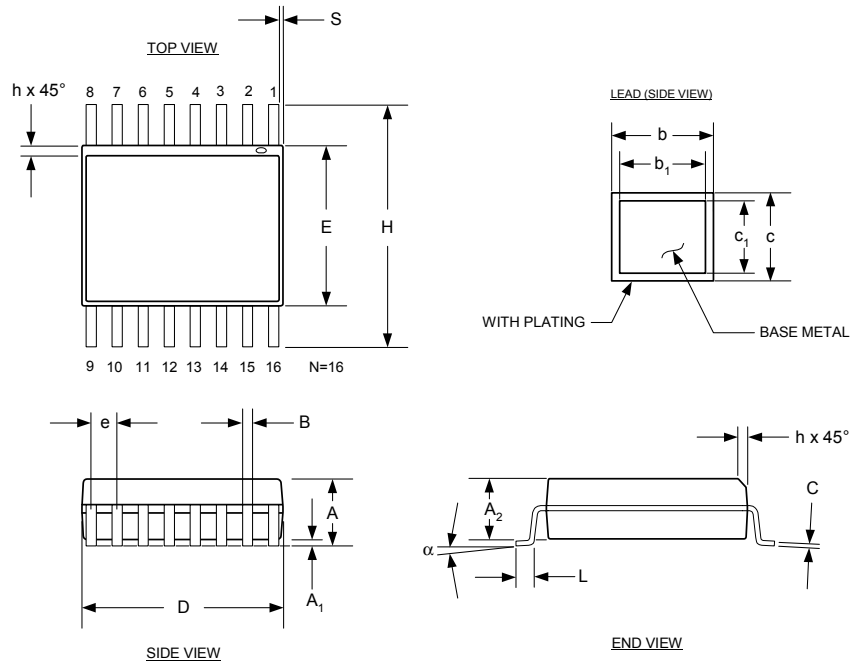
Package Outline Drawing SSOP16, 150 MILS
